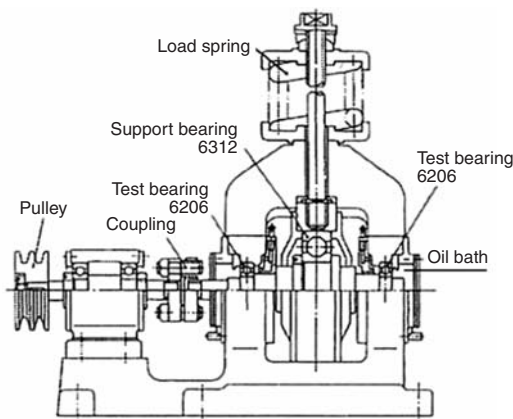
Schematic drawing of rolling contact fatigue life tester for ball bearing
